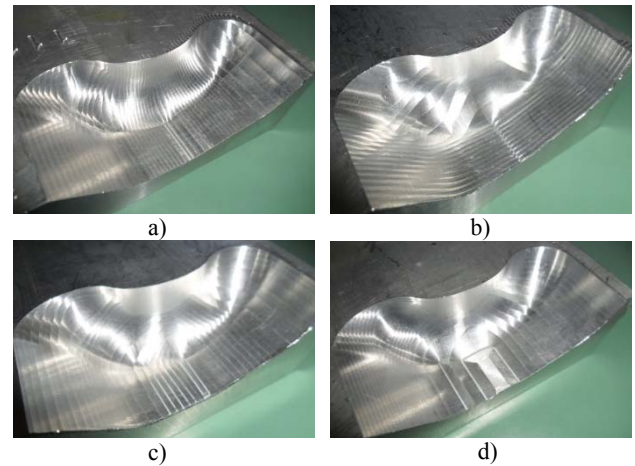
Parts made with appropriate machining strategies: a) *Raster 90°*; b) *Raster 0°*; c) *Offset z=const.*; d) *Offset z≠const.
